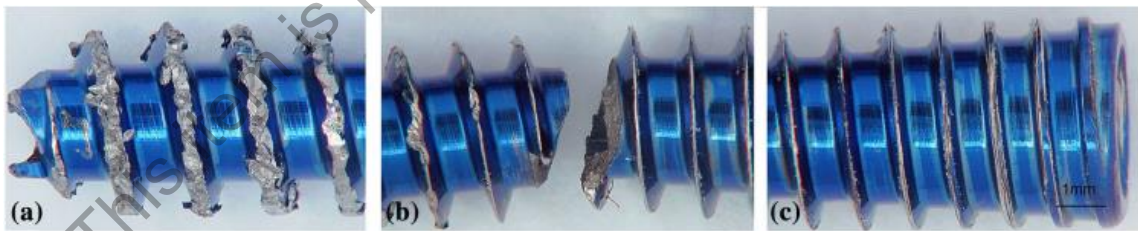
(a) Thread flattening flute screw, (b) fracture occurred caused taper and flute transition, (c) tapered region on screw (Kar et al., 2016).
